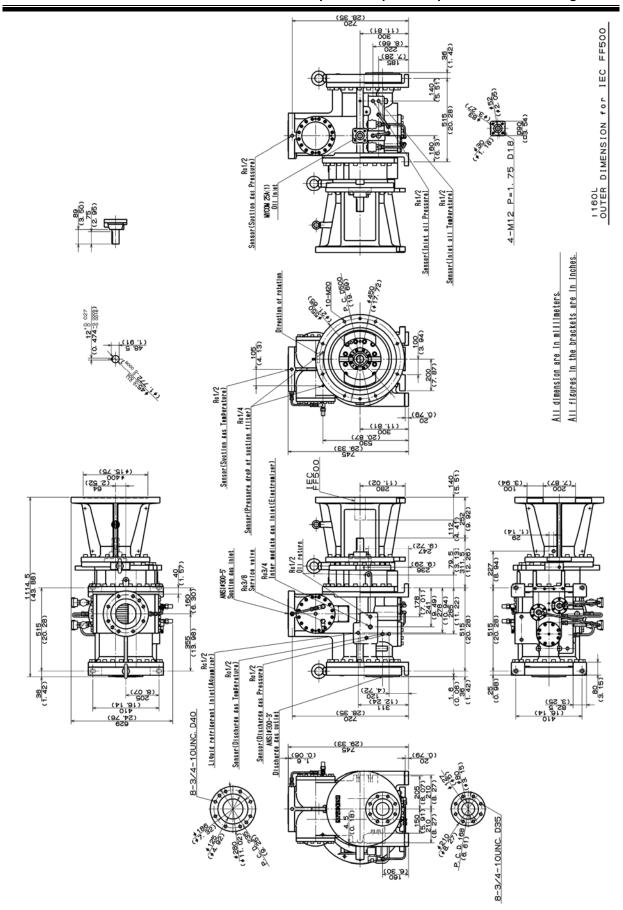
i160L Outer Dimensions with a Spacer for Flange Motor (IEC FF500)
